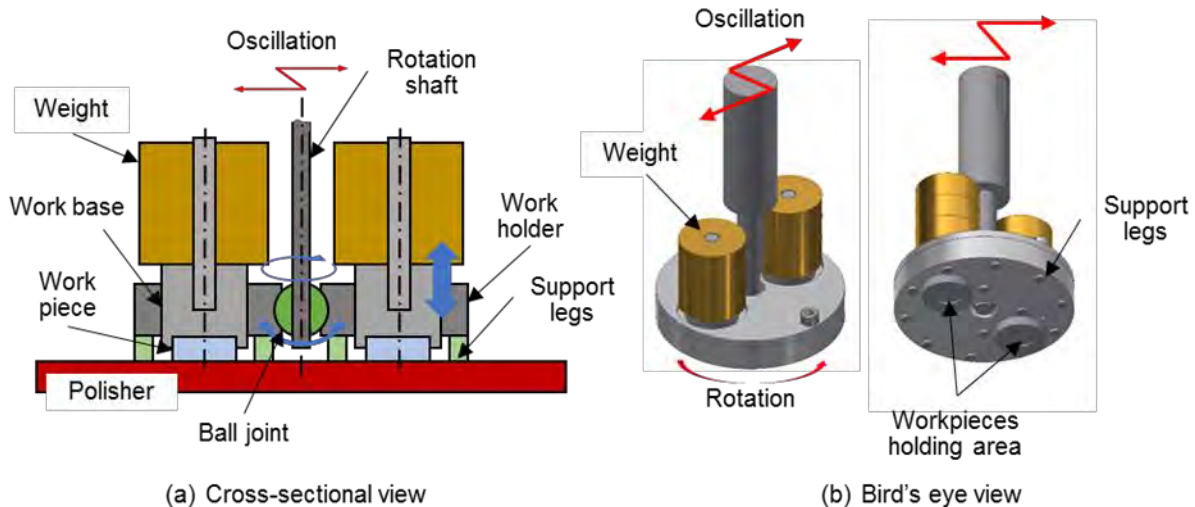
Schematic view of the holding structure for workpieces developed in this study.
